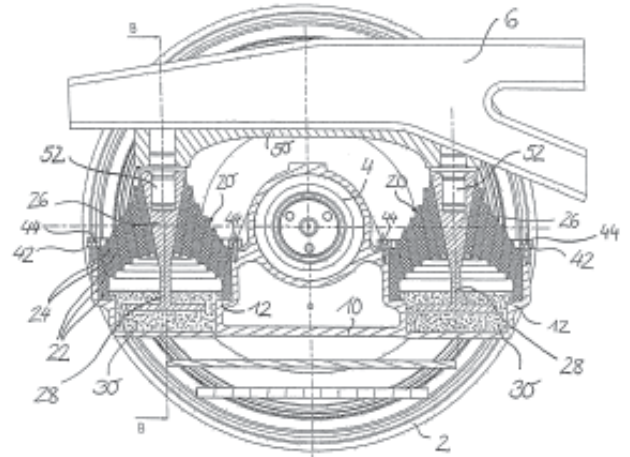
Rubber springs used in Y25 bogie suspension [8]
